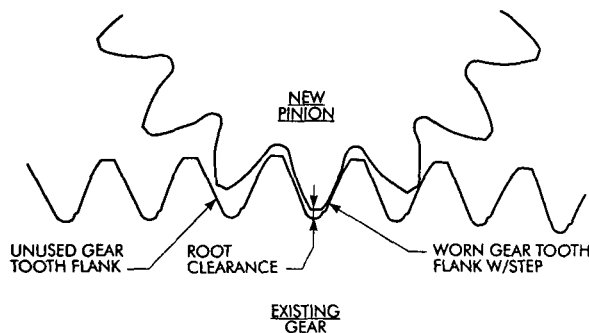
NEW PINION MATING WITH EXISTING GEAR
